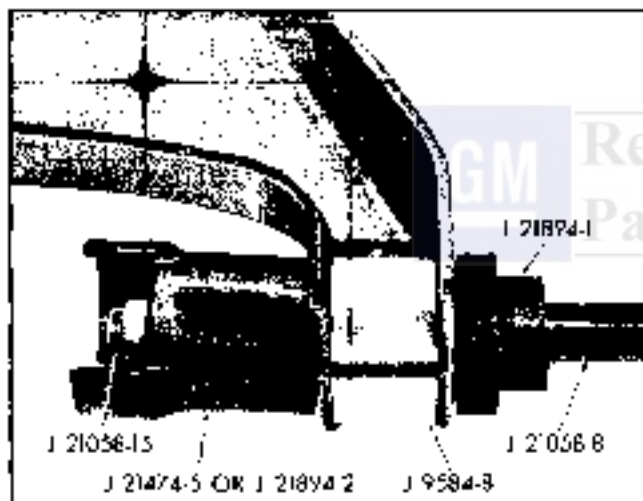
Installing Pontiac Lower Control Arm Front Bushing or Tempest Lower Control Arm Rear Bushing
